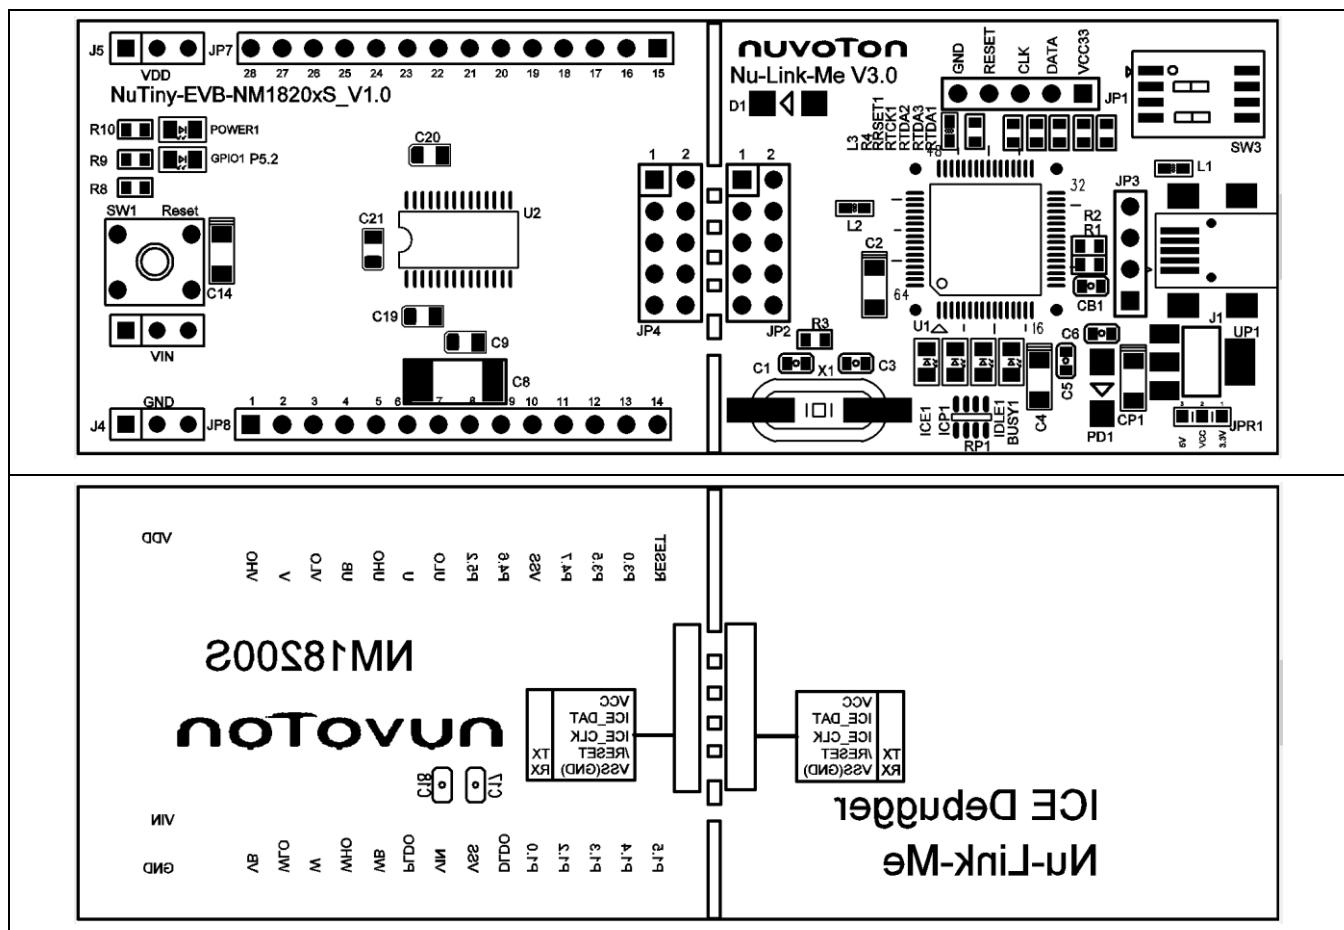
NuTiny-SDK-NM1820xS PCB Placement
